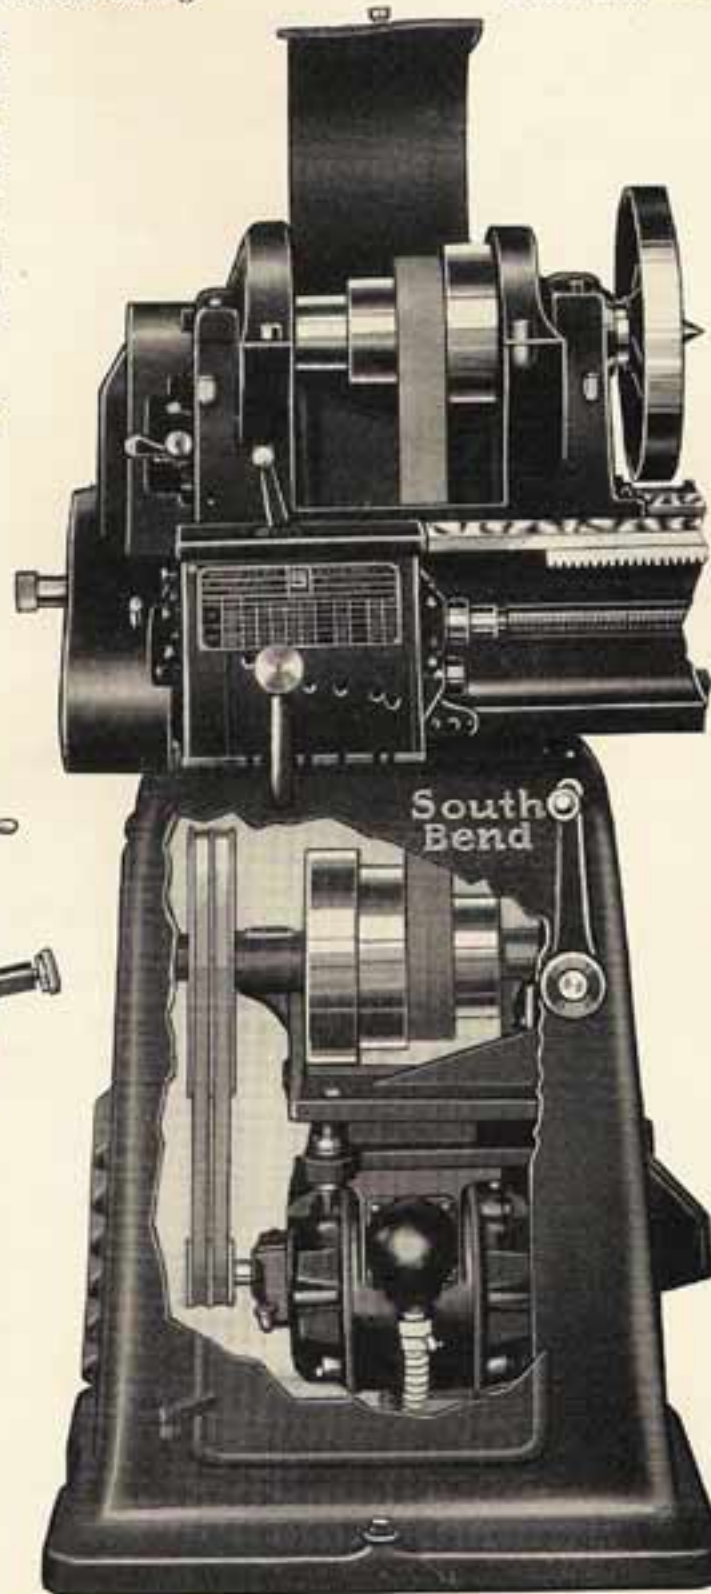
Front view of lathe with door cut away showing arrangement of driving mechanism.
